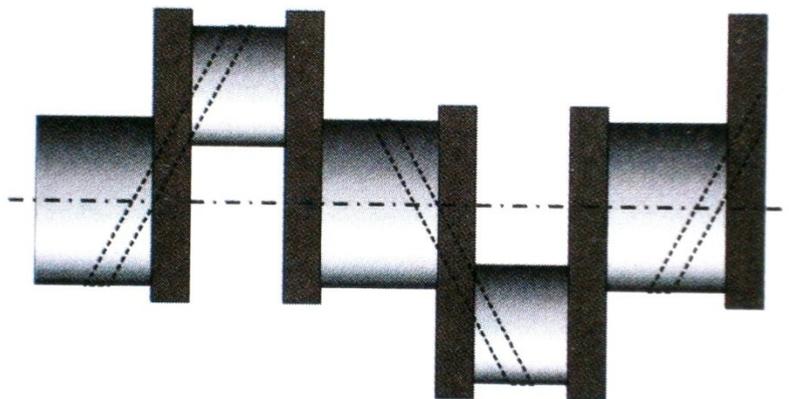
The crankshaft is machined with diagonal oil passages to conduct oil from the main bearings to the crankpin journals in order to lubricate the big-end rod bearings.
